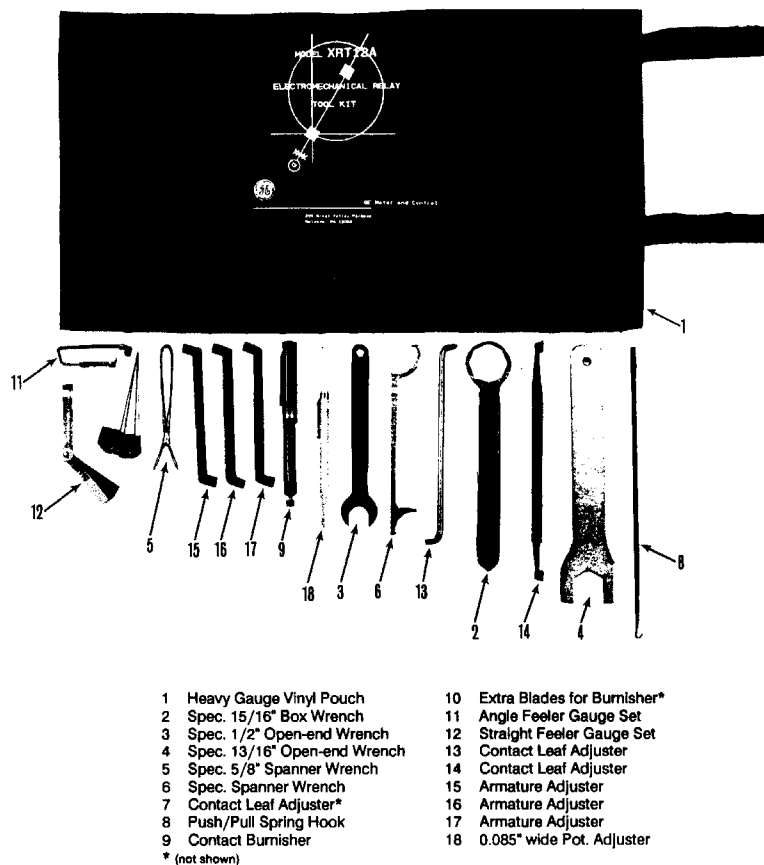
Relay Adjustment Tools (Courtesy GE)
